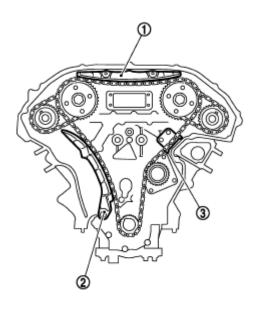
Identifying Lower And Upper Mounting Bolts Of Timing Chain Tensioner Courtesy of NISSAN MOTOR CO., U.S.A.
